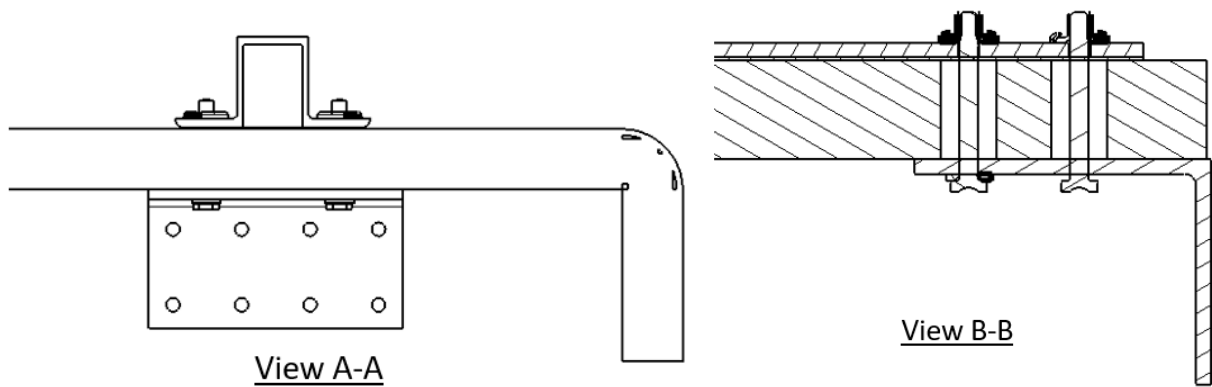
Rail Flange – Ceiling Panel – Angle Joint Geometry
